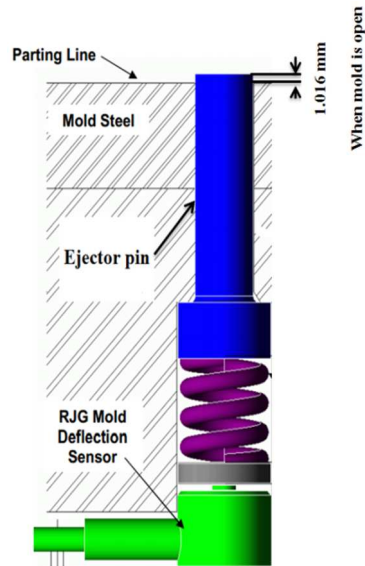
Mold deflection sensor installed in cavity block on parting line [6]
